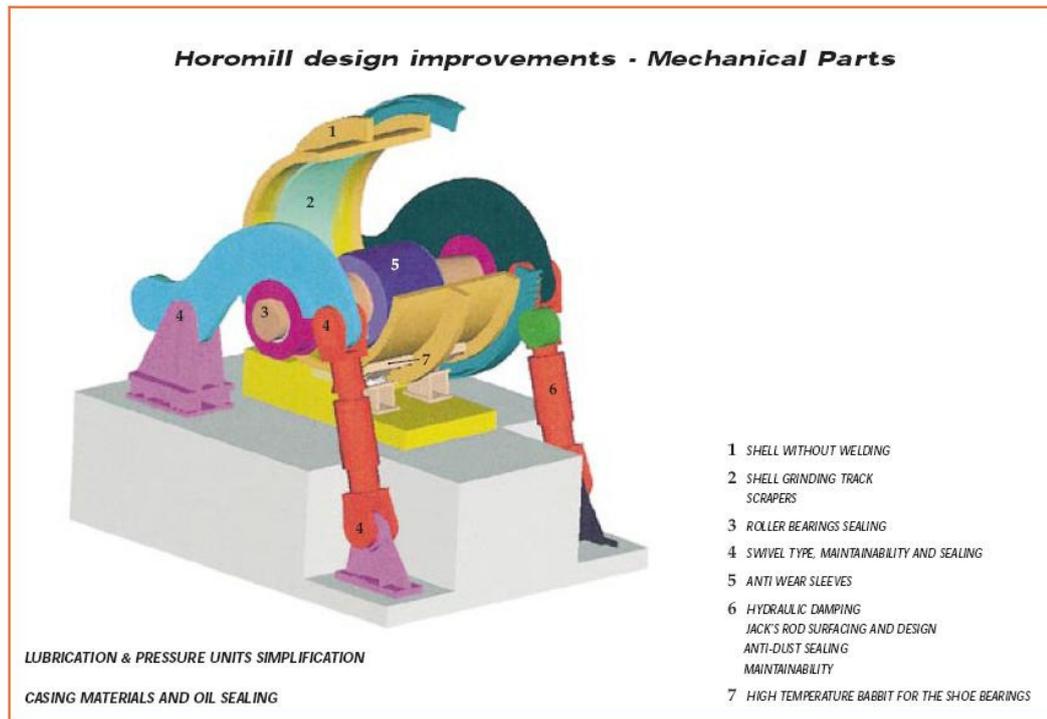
Mechanical Parts of HOROMILL® [25]
